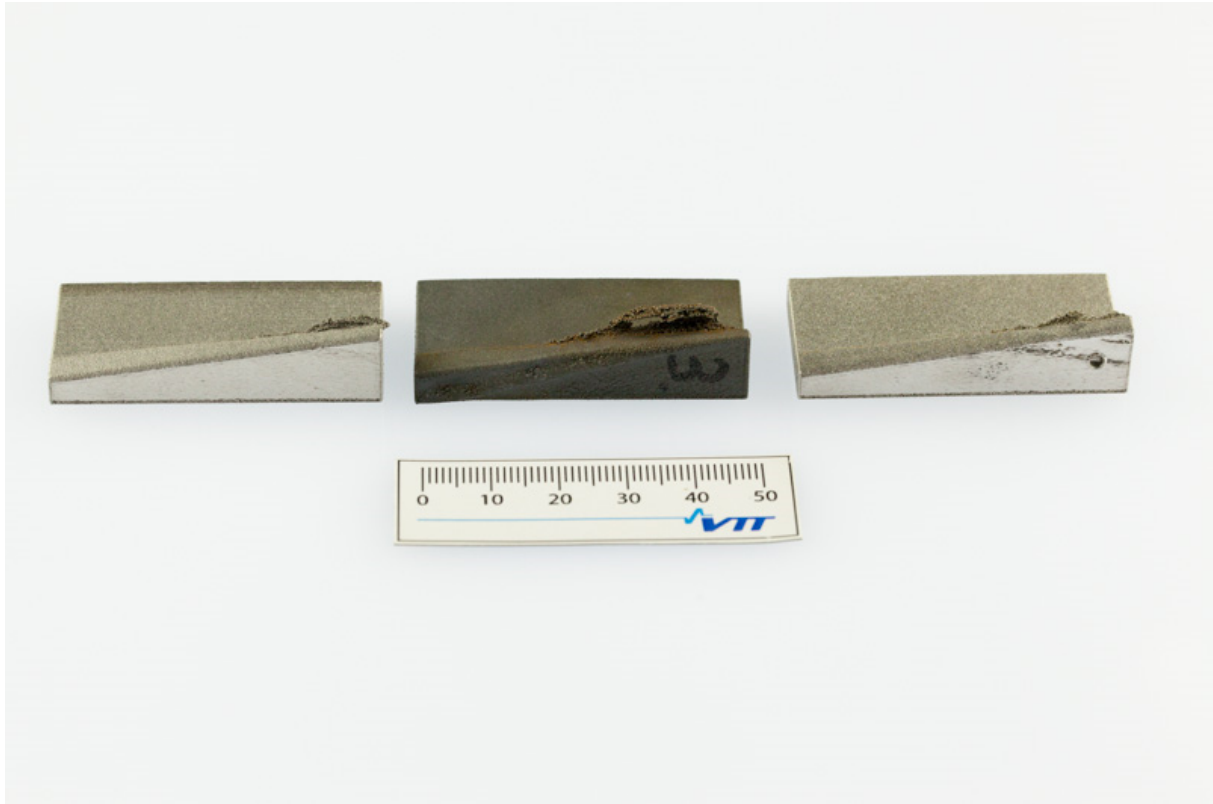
The overhang test pieces with and without fillet printed in H13 (middle) and 316L.
